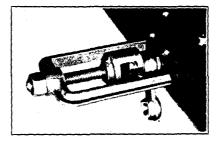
Pulling Spring Shackle Bolt with Tool 83222
